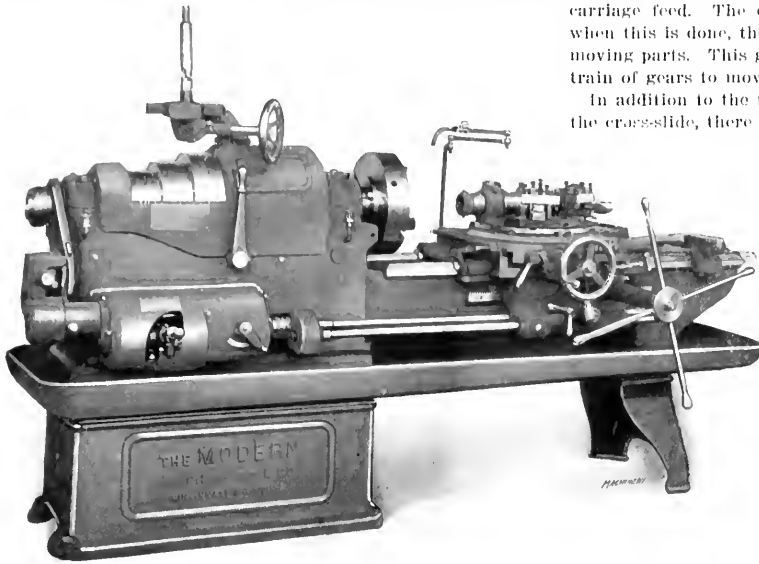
Modern Flat Turret Lathe equipped with a Cross-slide
